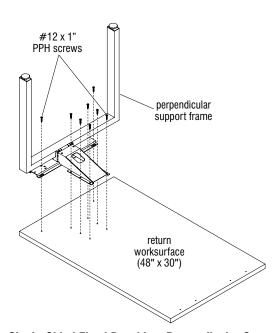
Single-Sided Fixed Benching, Perpendicular Support Frame Installation
